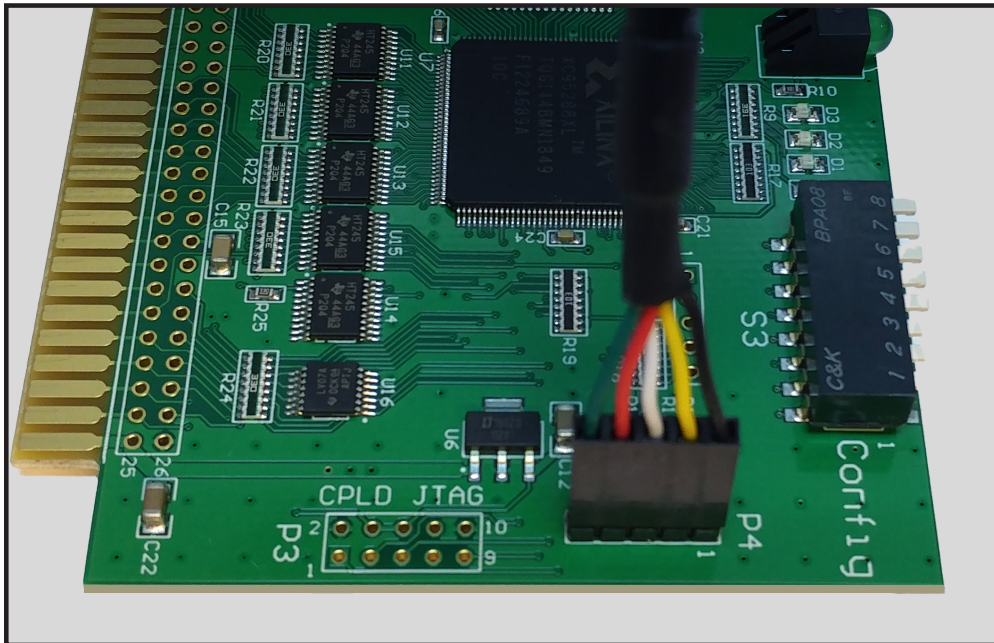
Remote Cable to CFFA 3000 P4 Connector
